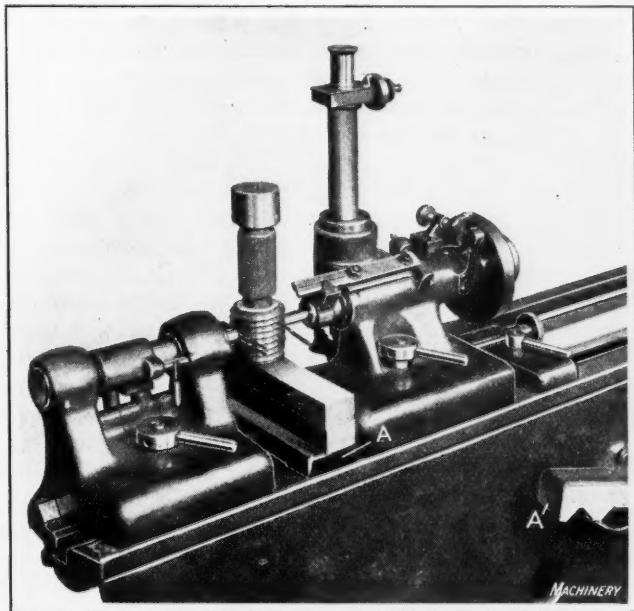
Method of mounting Small Thread Plug Gage for measuring by the Three-wire System
